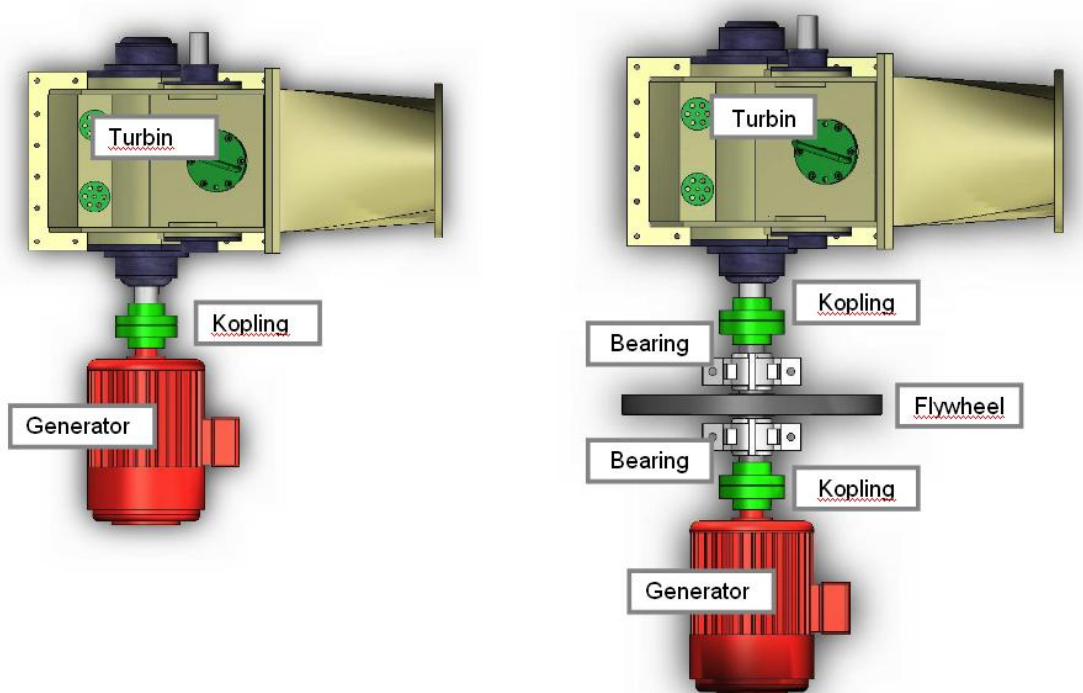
Schematic view of 2 direct drive transmissions used for micro hydropower installations. The first shows the turbine directly coupled to the generator shaft via a coupling. The 2nd shows the integration of an intermediary driveshaft, coupling and flywheel assembly into the transmission.
